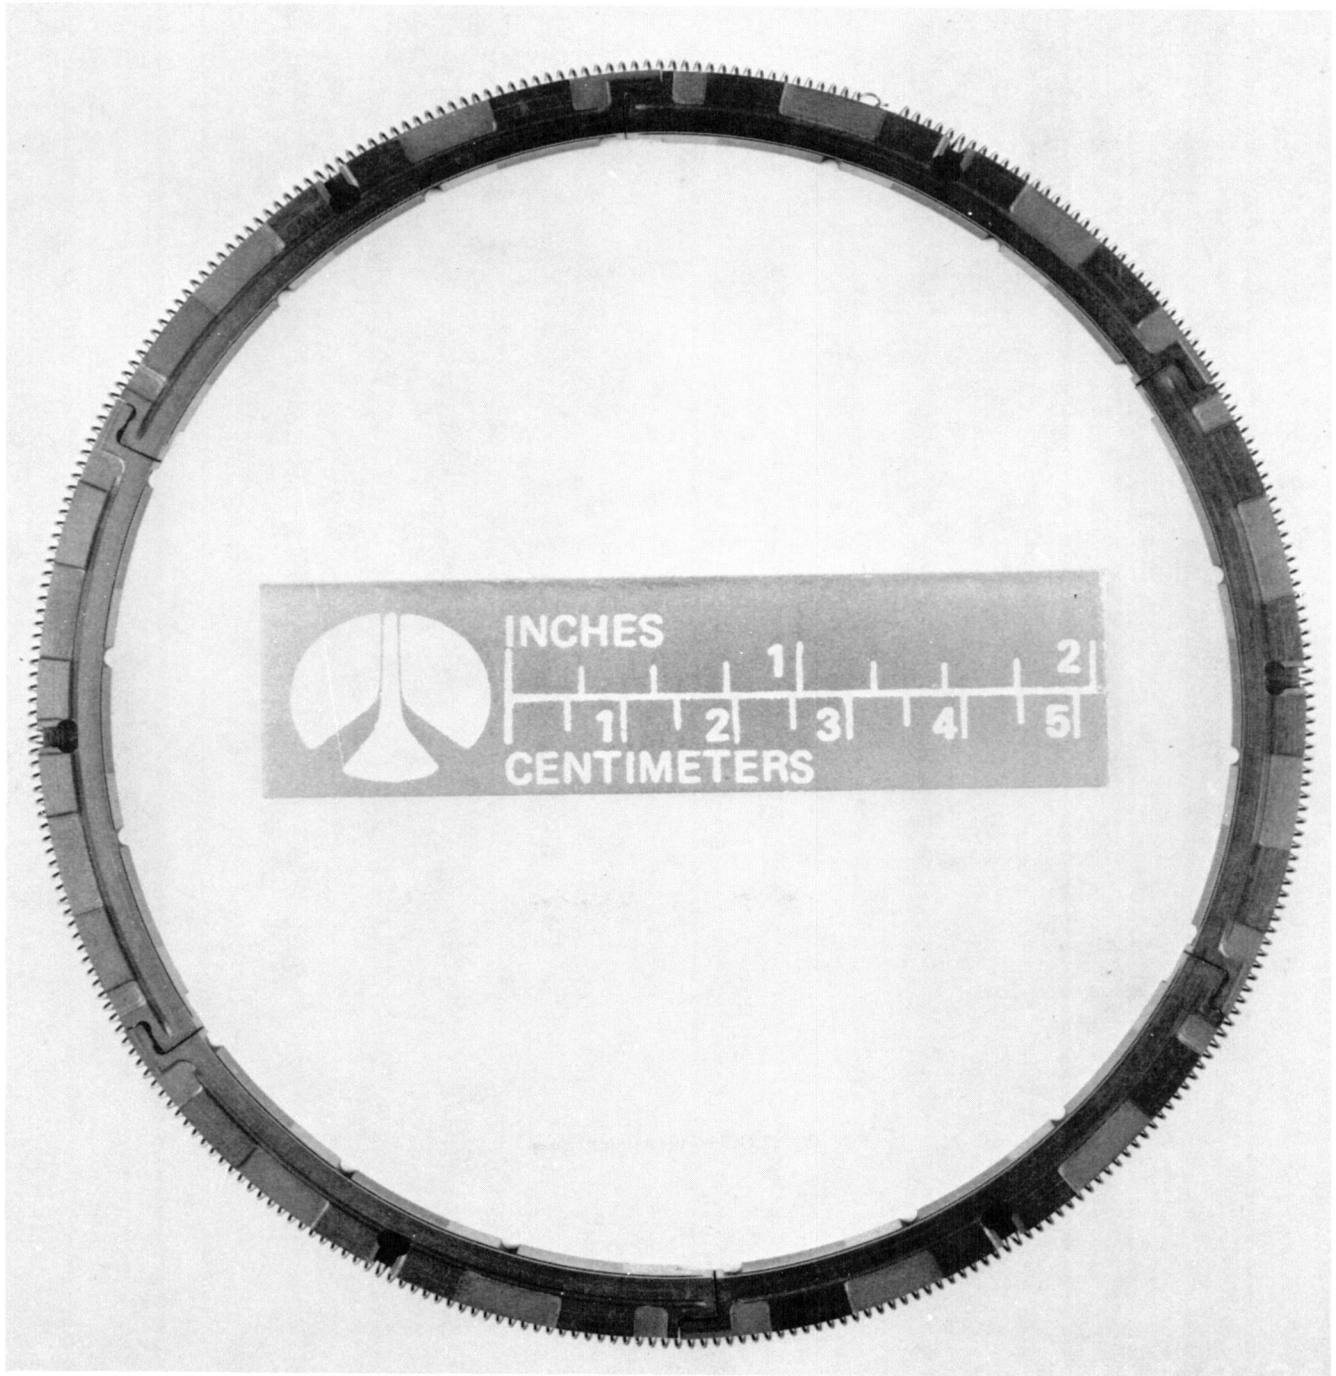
Assembled Six-Segment Helium Seal Ring, Segments B-5
